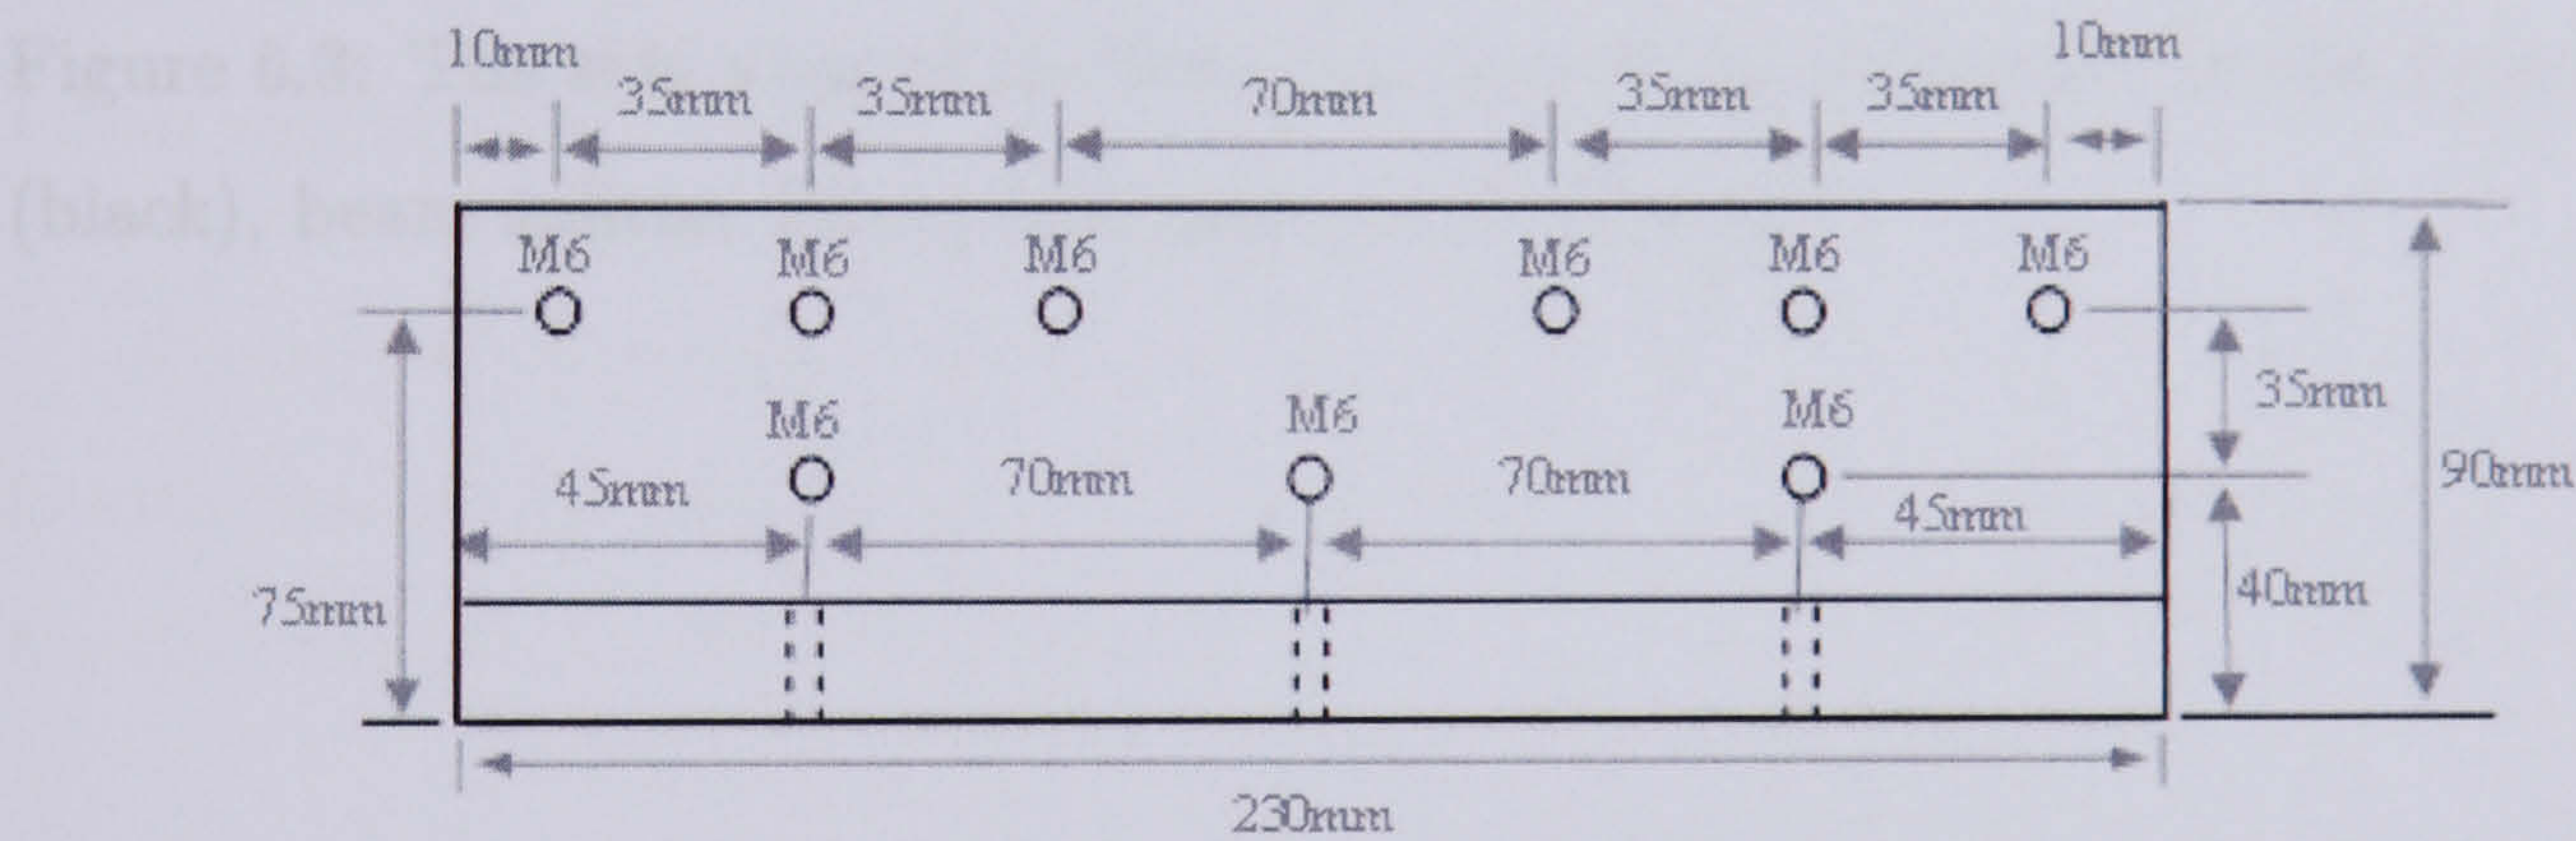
Plan view dimensions of the floor component mount holder for the focusing unit, beam splitter and mirror.
